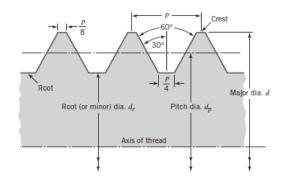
Unified and ISO thread geometry. The basic profile of the external thread is shown.
